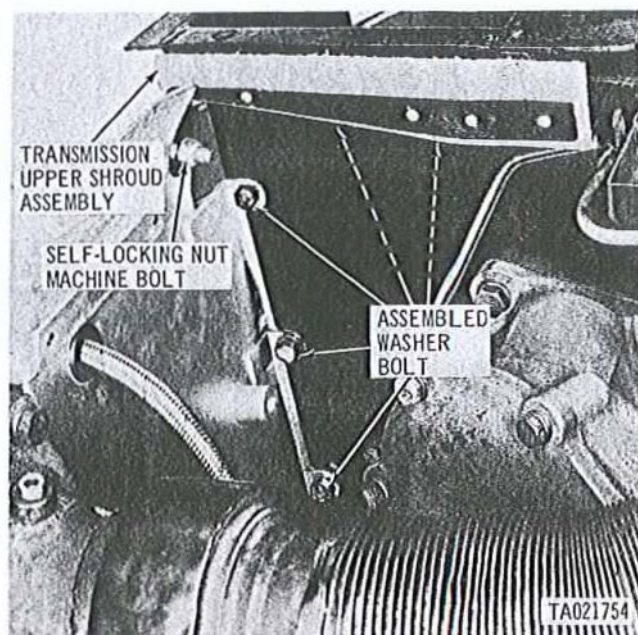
Disconnecting or connecting oil cooler support frame, model AVDS-1790-2C engine.
